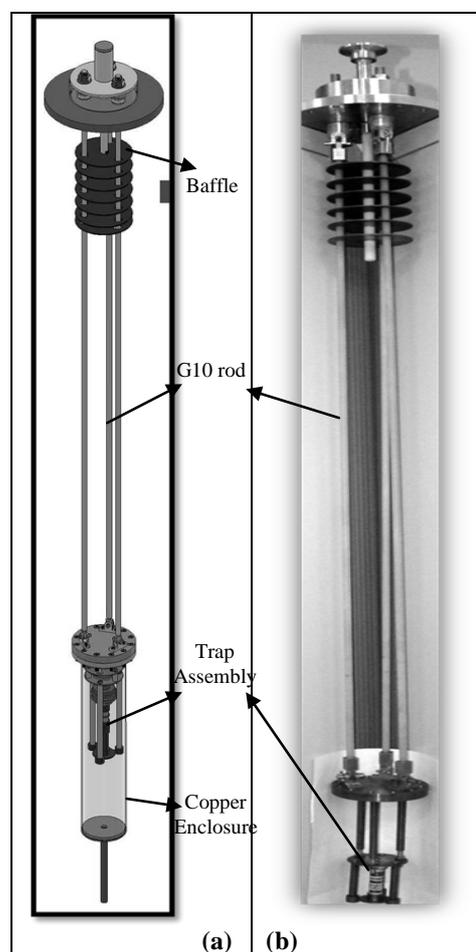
(a) Trap assembly conceptual and (b) fabricated and assembled trap assembly
